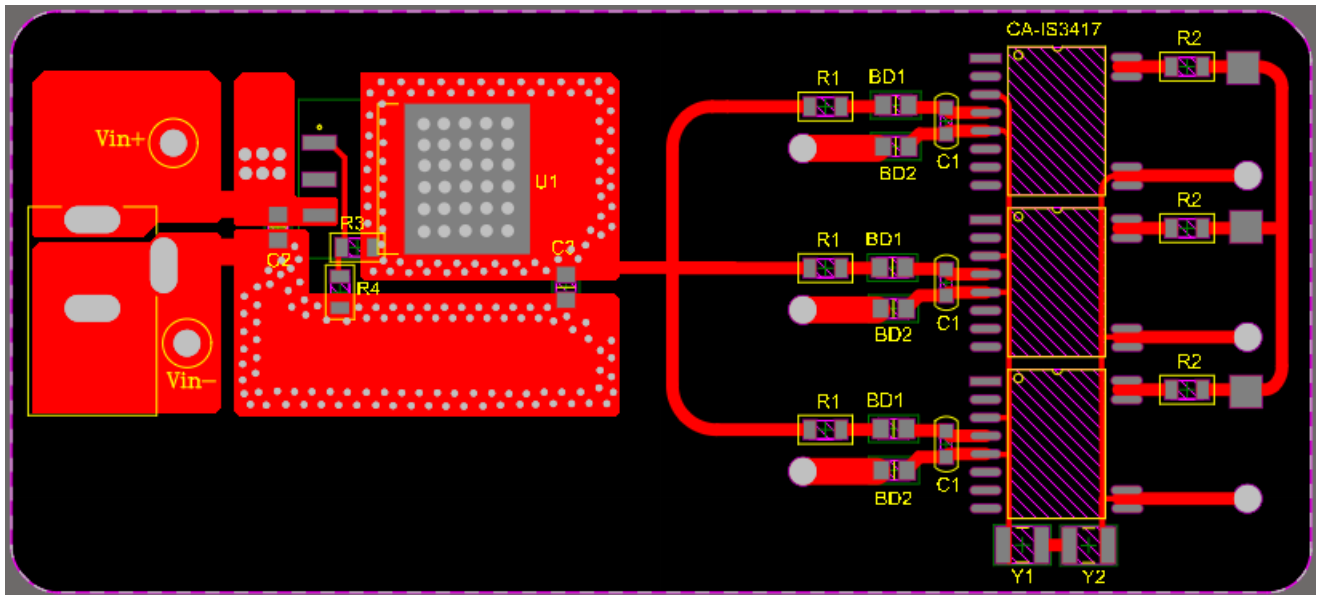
CA-IS3417WT-Q1 Reference design PCB top layer
